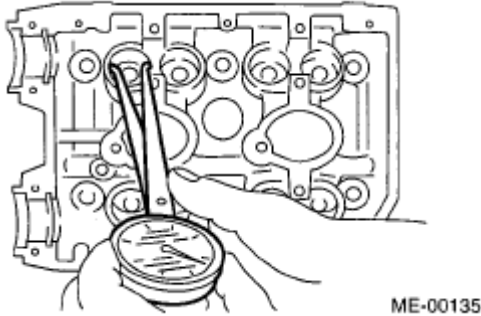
Measuring Inner Diameter Of Valve Lifter
